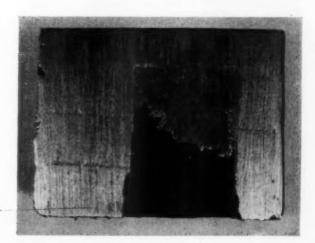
Section of penetrated green sand core; 30-in. casting, poured at 2900 F. (Outside edge of casting at left, ingate side at right.)
